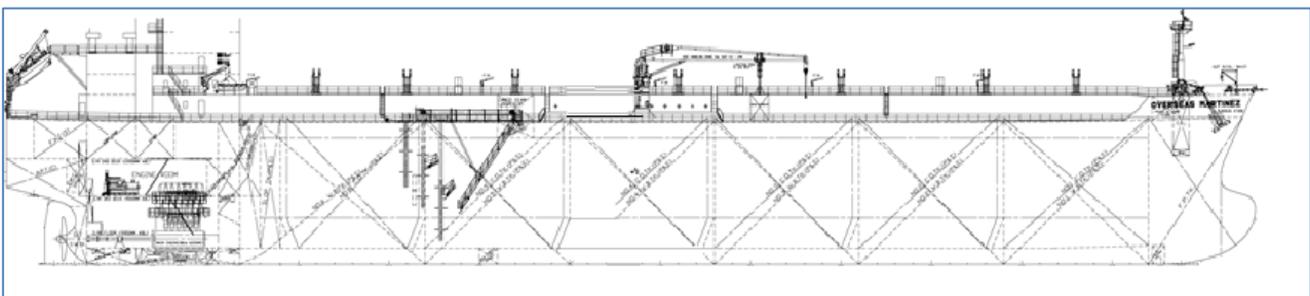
General Arrangement of a Typical 47,000 DWT Tanker
